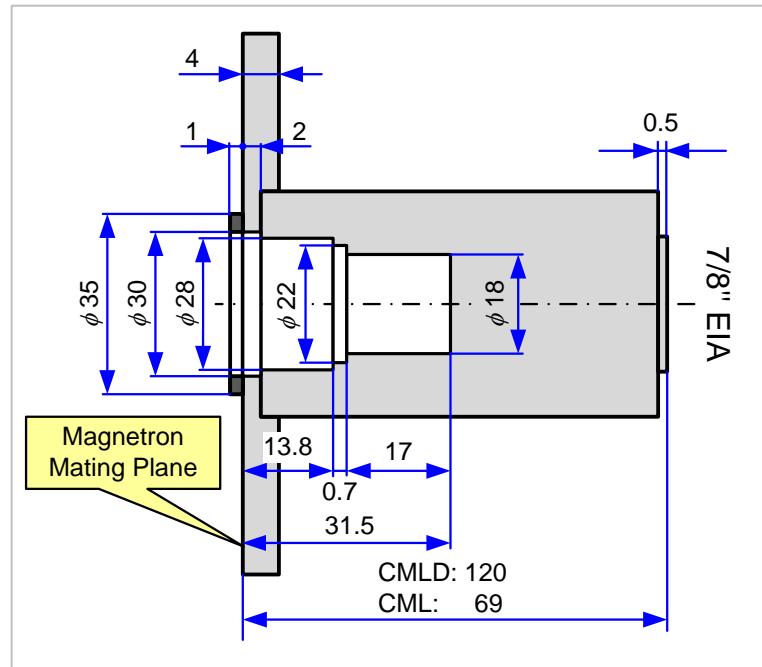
Dimensions in millimeters of the cavity for magnetron antennas.
